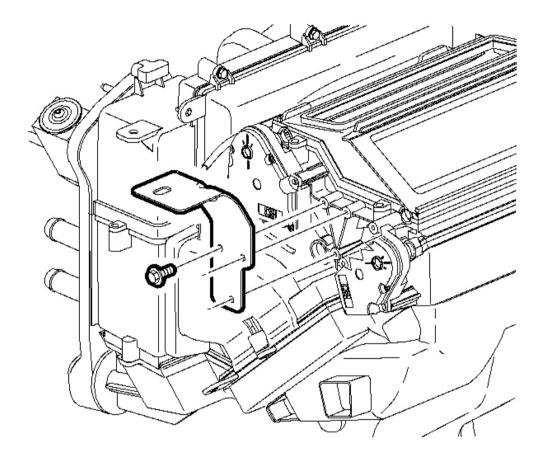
HVAC Module, Bolts & Cross Car Beam Courtesy of GENERAL MOTORS CORP.
